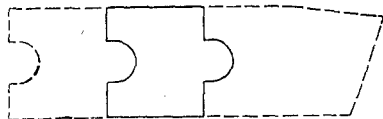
Improved stamping operation with two pieces formed at each stroke of machine and no waste material.
